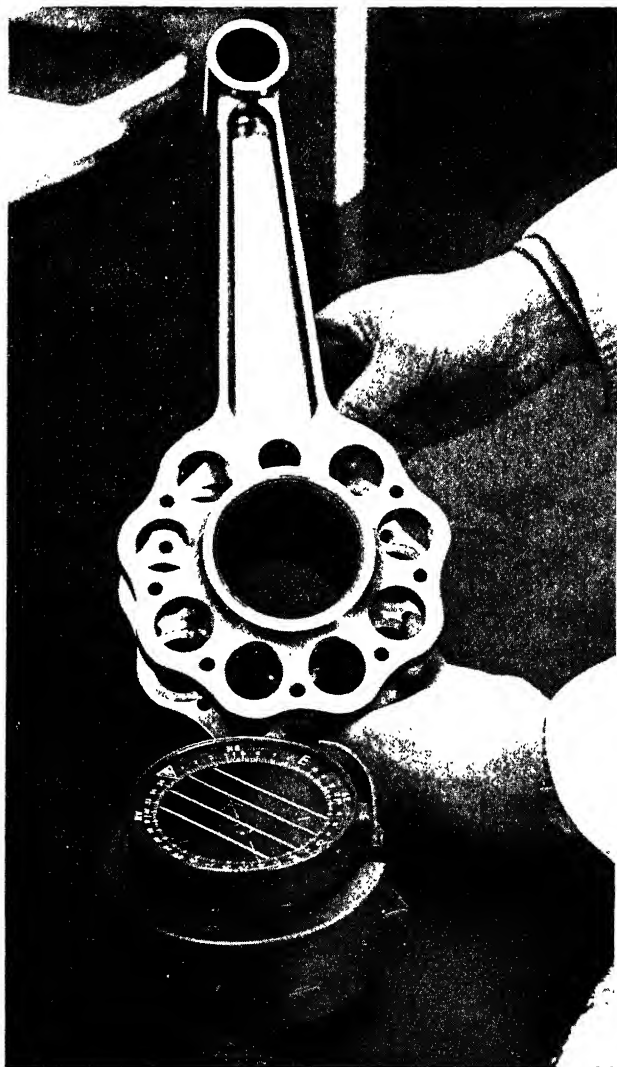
CHECKING MASTER ROD AFTER DEMAGNETISING
